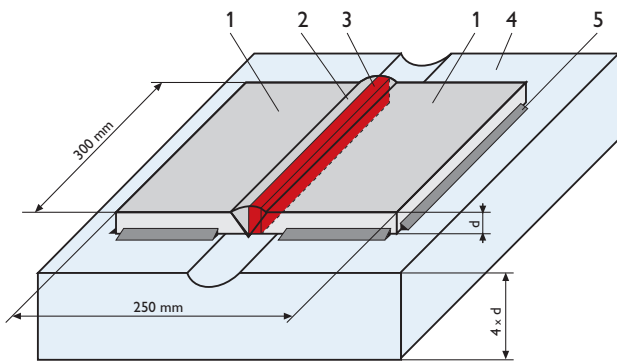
Structure of test: 1...Parent metal, 2...Weld seam, 3... Test specimen, 4... Rigid base plate, 5... Anchored welds; d... Wall thickness of parent metal
